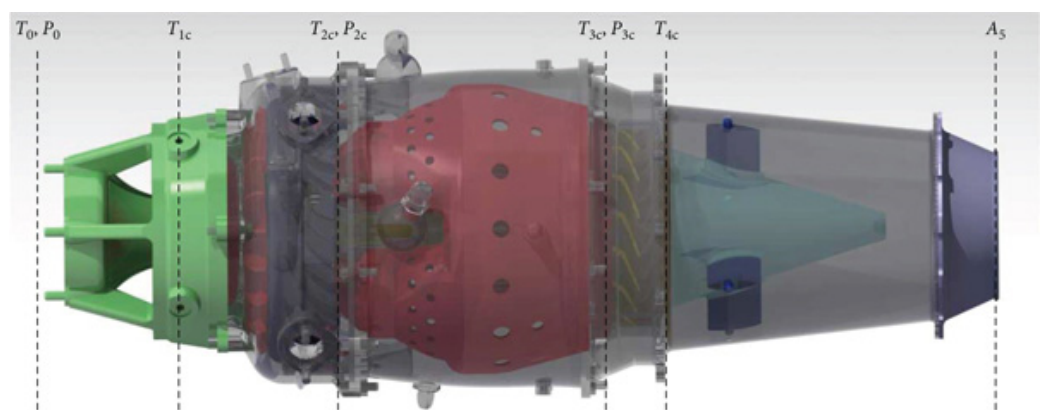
Measurement points on the iSTC-21c jet engine [30].
